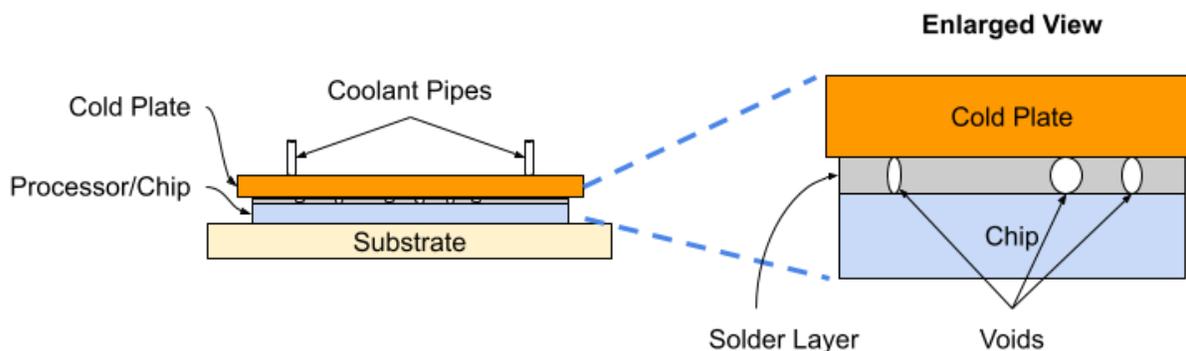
Heat transfer can be hindered by voids formed during soldering process
